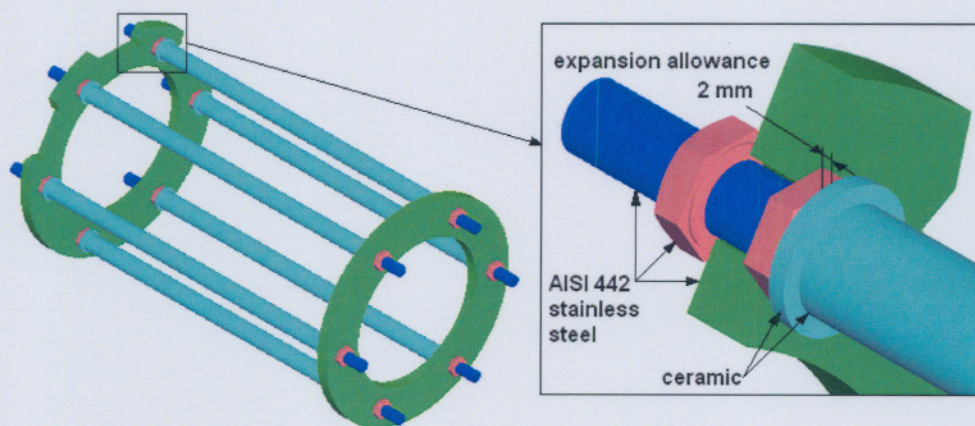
Modified heater concept (Appendix 7: drawing group INST_HEA)
